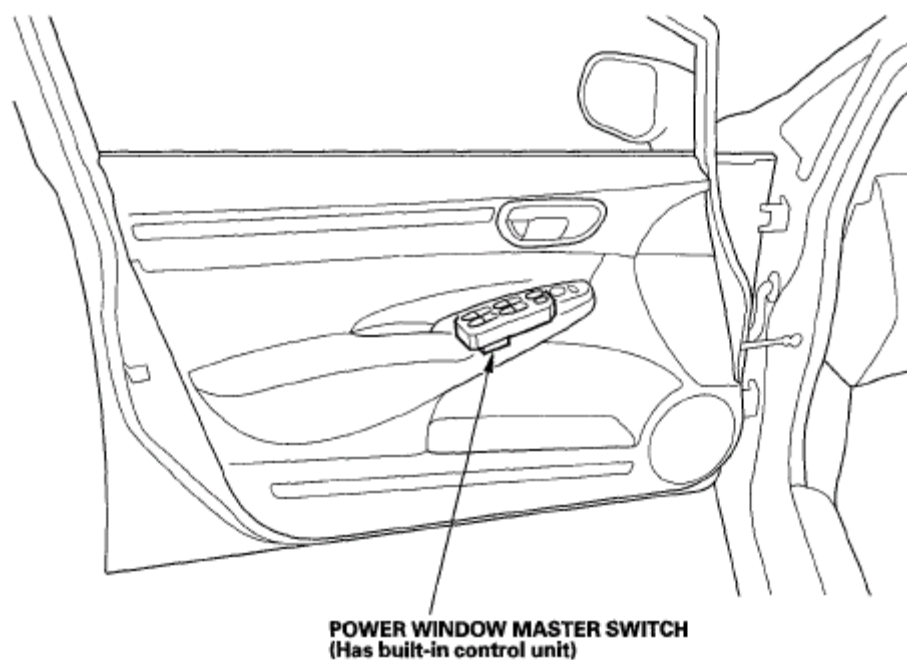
Identifying Relay And Control Unit Locations - Driver Door
